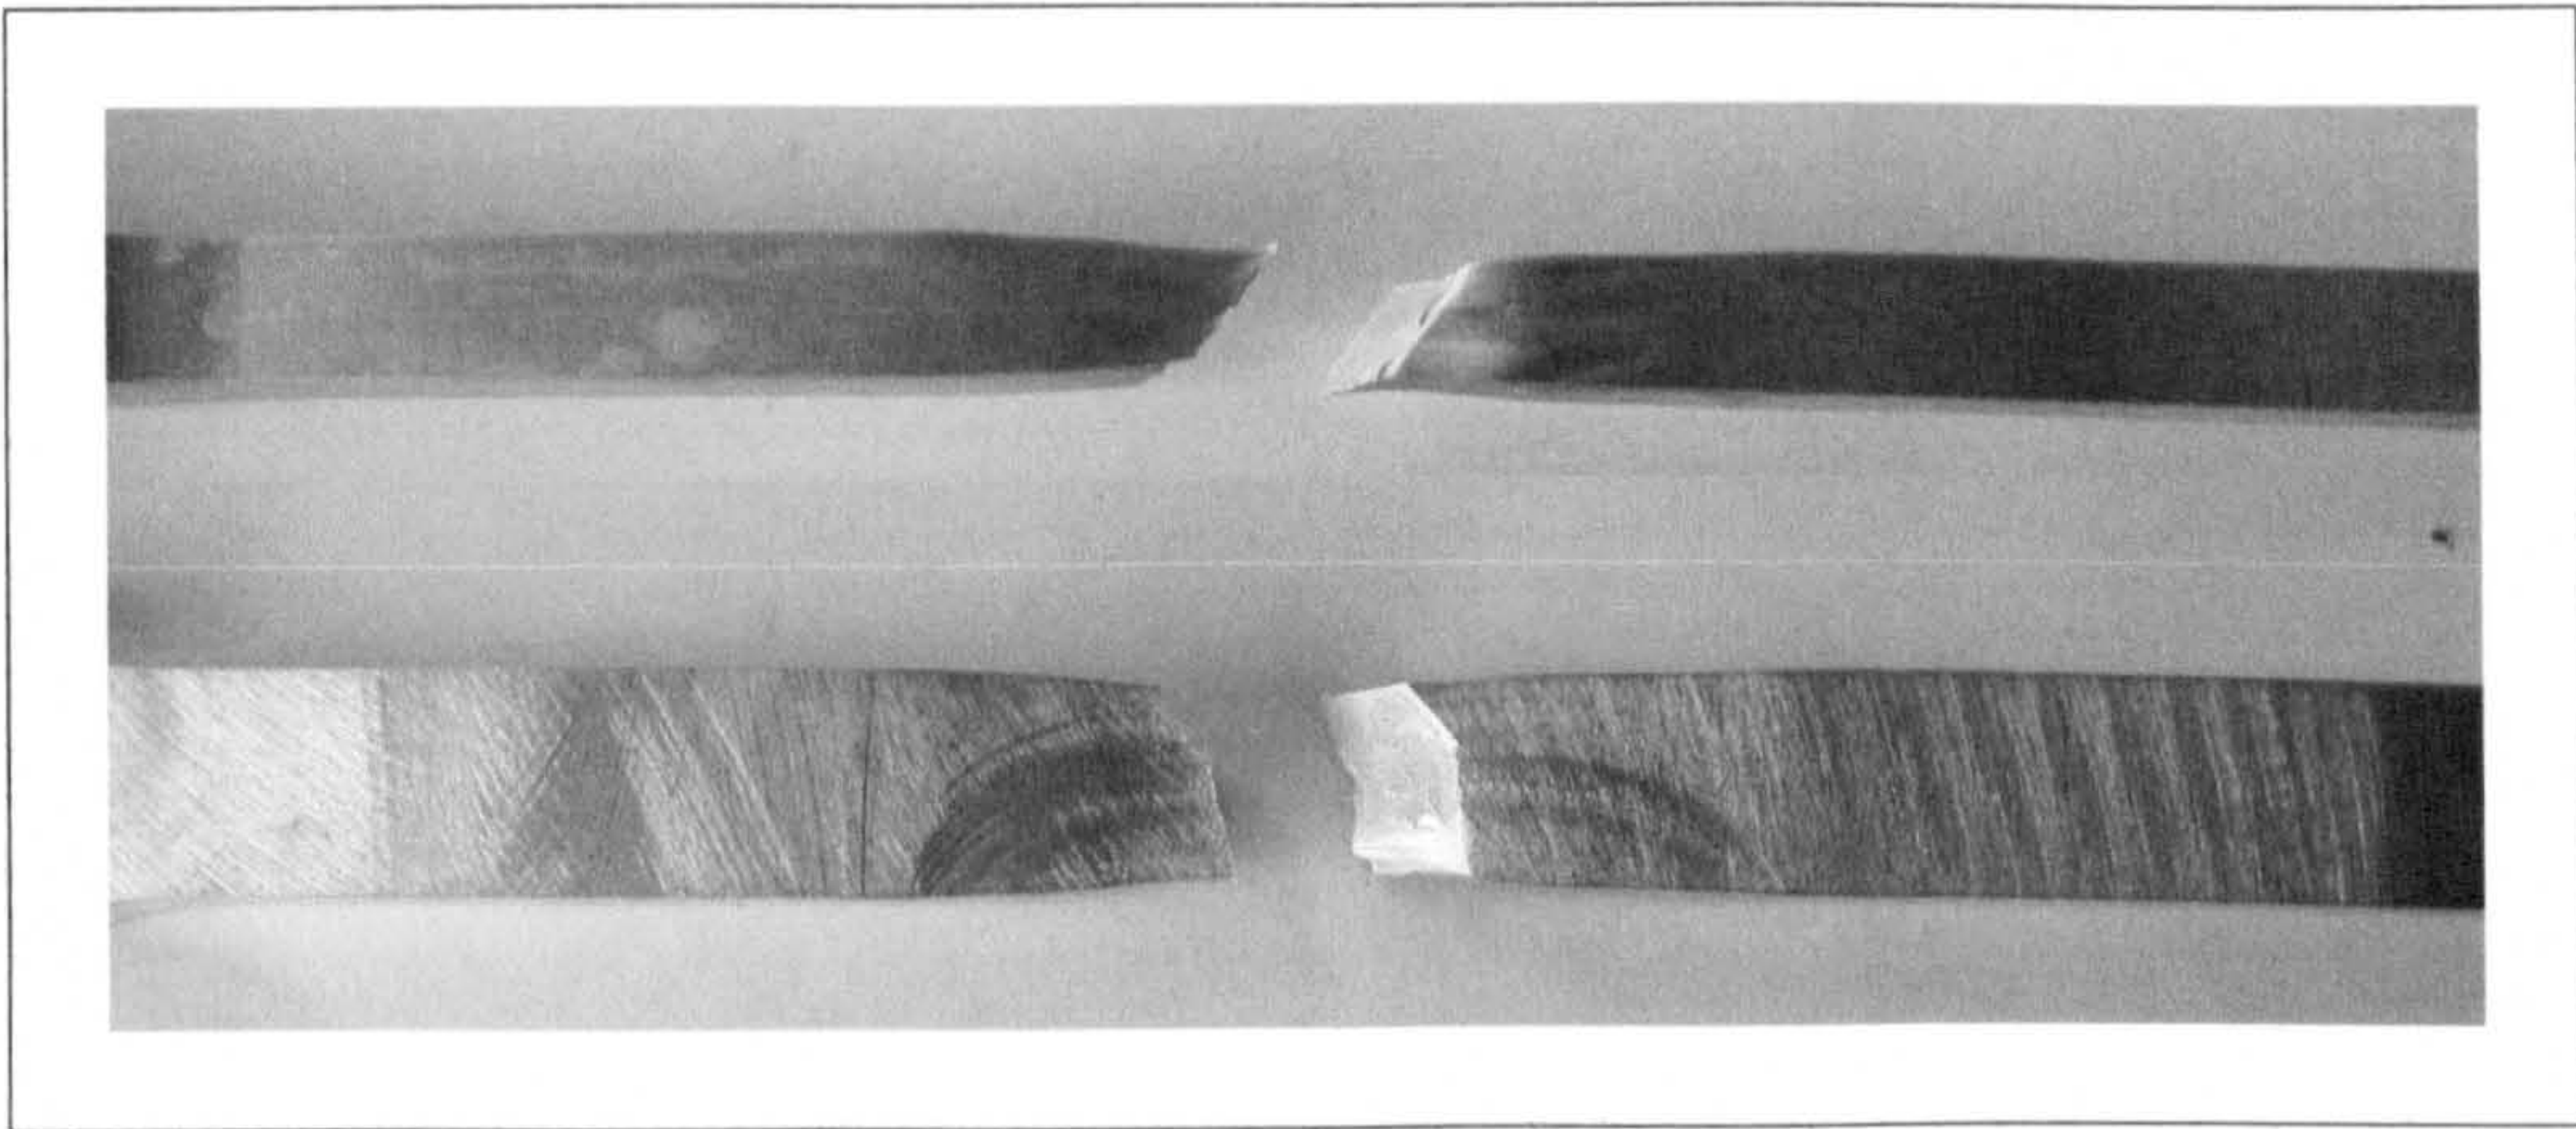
Shear failure and necking from monotonic uniaxial tensile testing of a FS SP welded AA 5383-H321.
